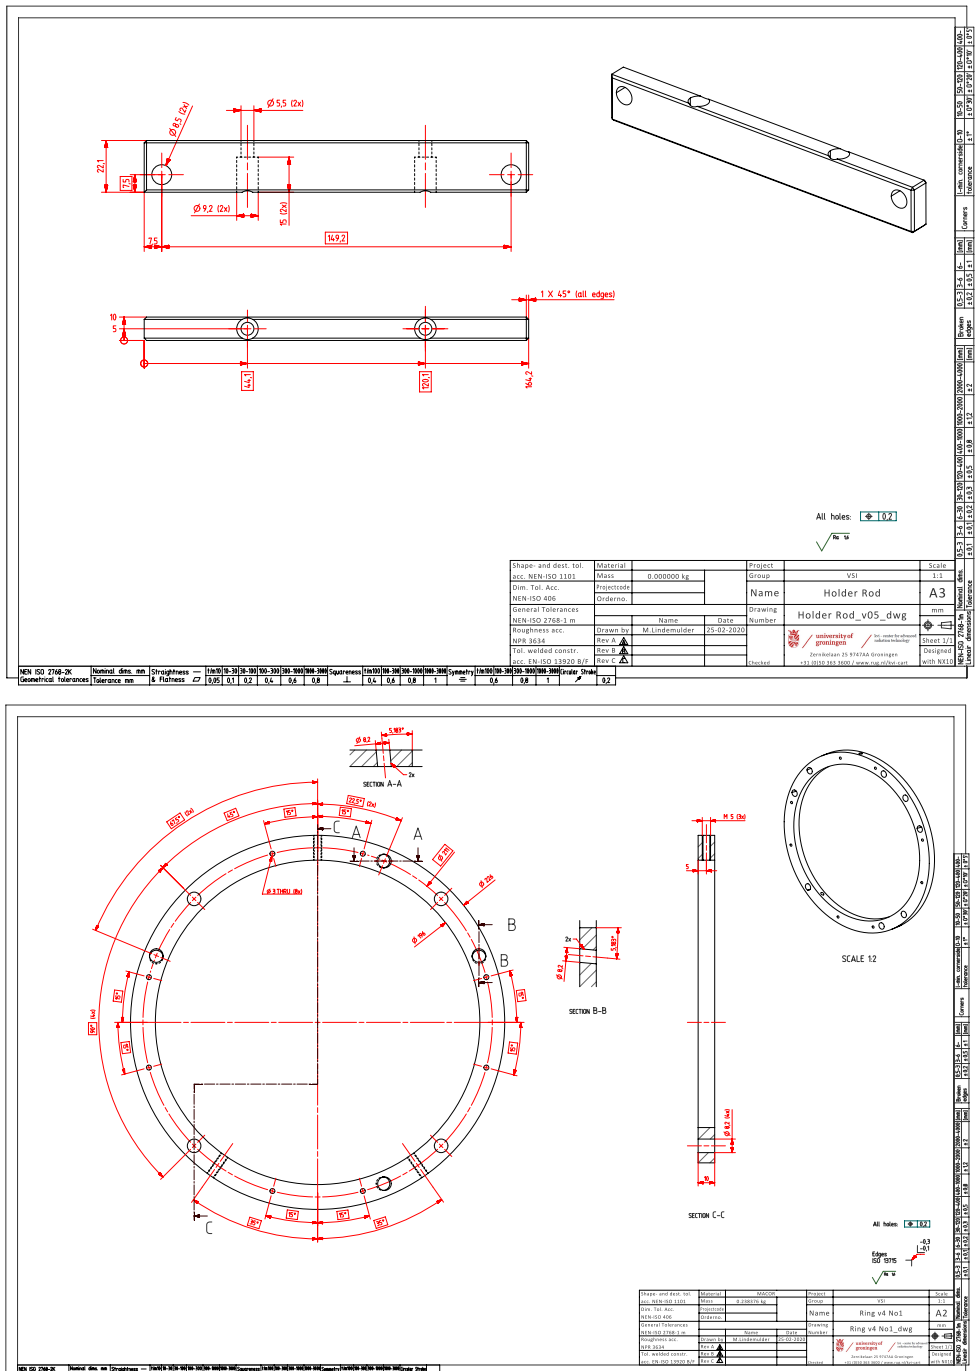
Drawings of Macor ITO plate holder rod and ring No1.
